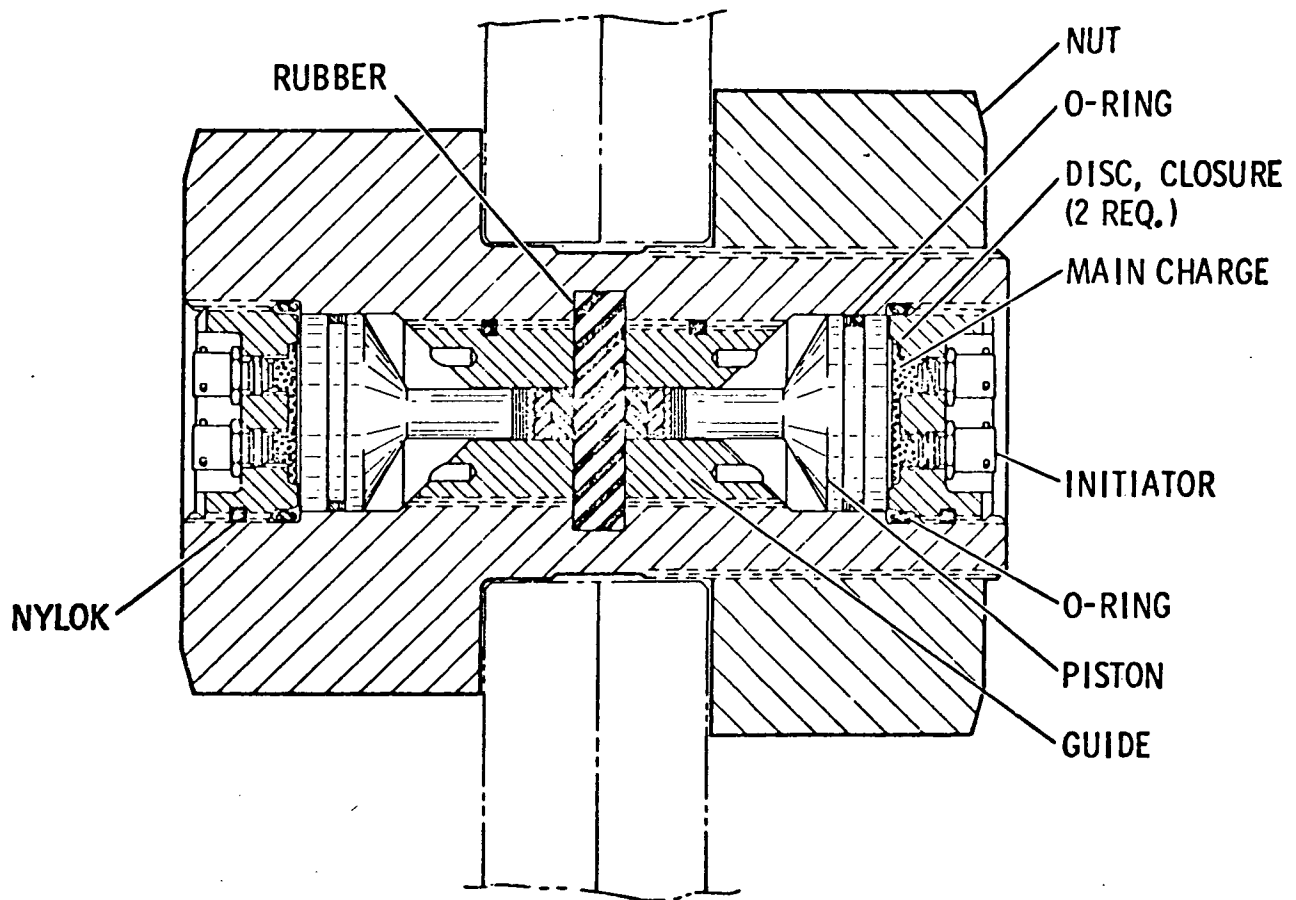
Typical Pyrotechnic Bolt Arrangement
